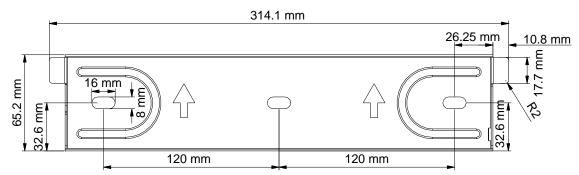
Rear panel dimensions of R5-(3K-6K)-S2-15
